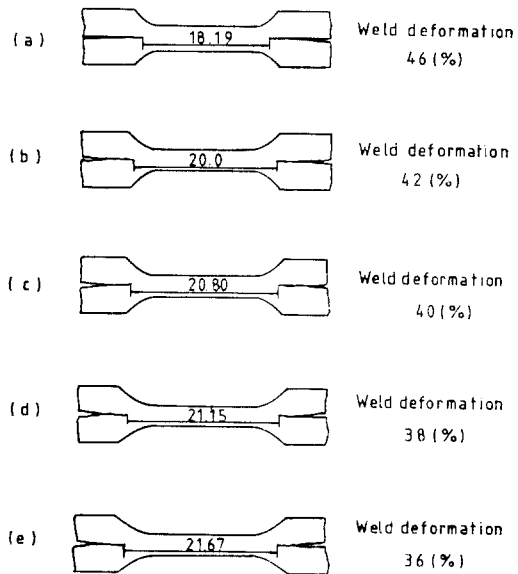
Relation of bond length on pressure welding zone.
